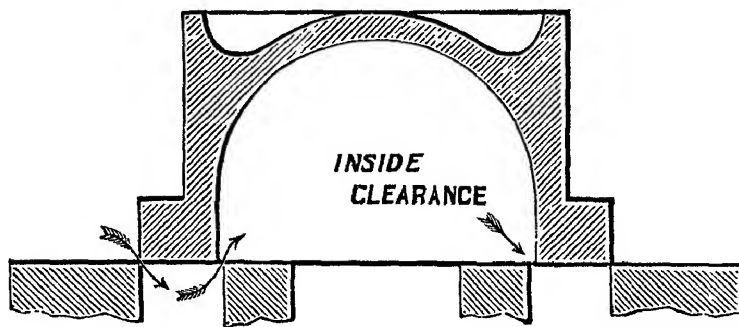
VALVE WITHOUT LAP AND WITH INSIDE CLEARANCE.
